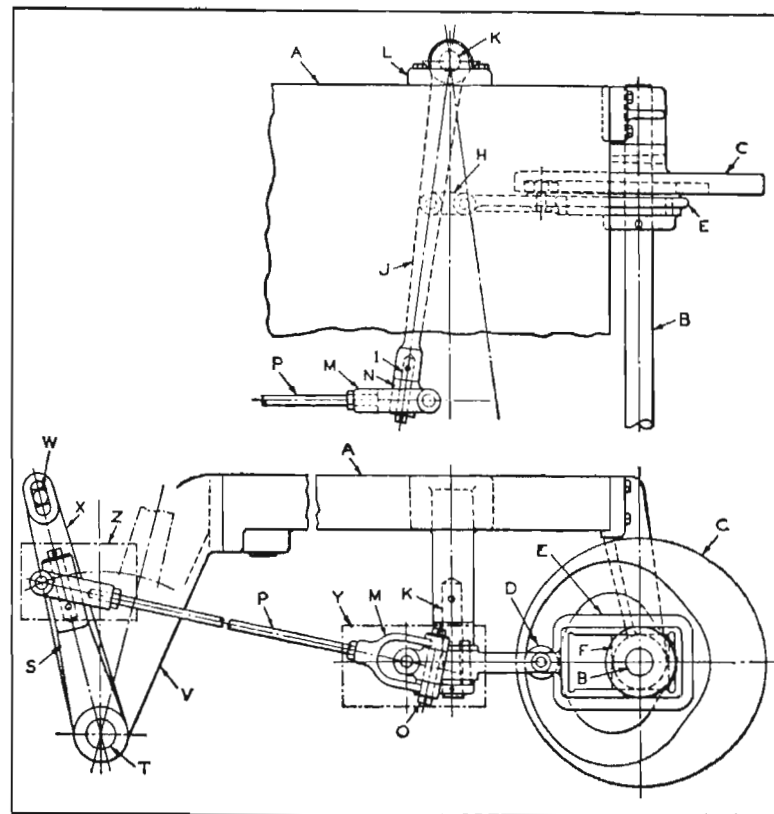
Mechanism in which Universal Joints are Used to Simplify Transmission of Movement from Horizontal to Vertical Plane.
